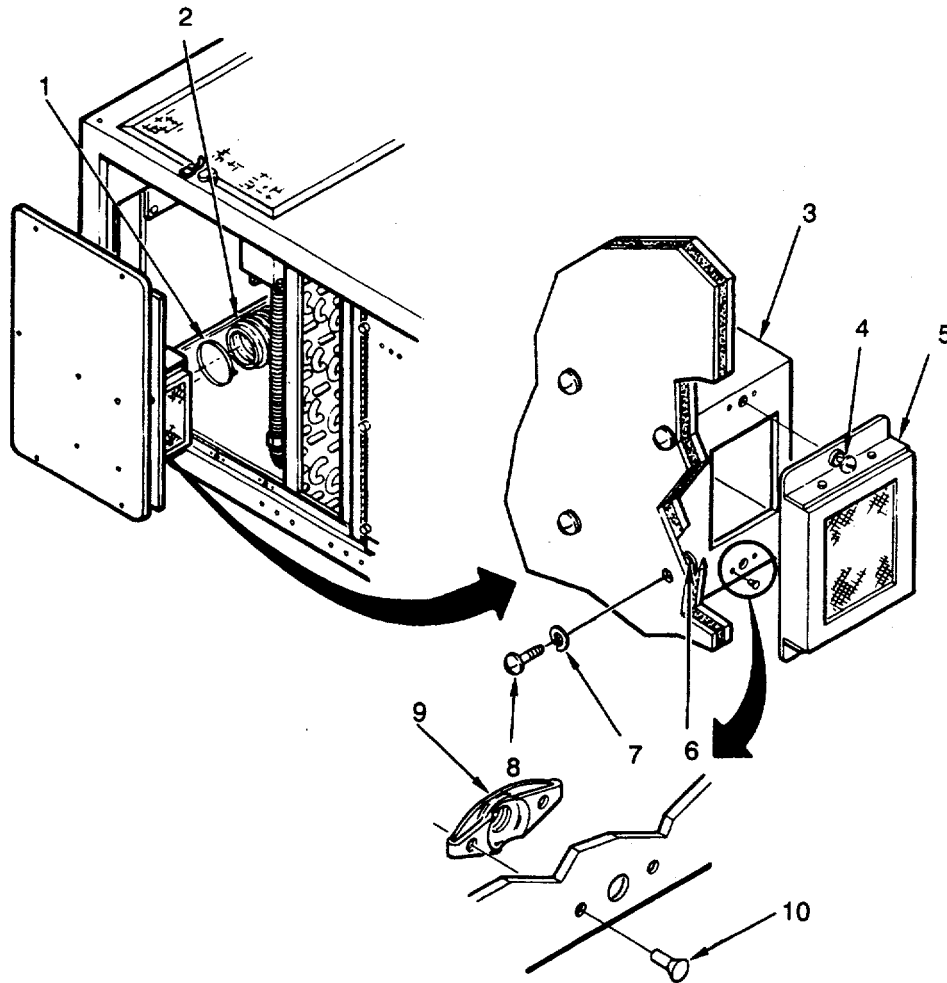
Fresh Air Inlet Filter Box (Evaporator Front Panel)
